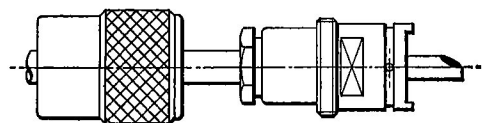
C—Assembly instructions—UHF Type plugs—Type A
